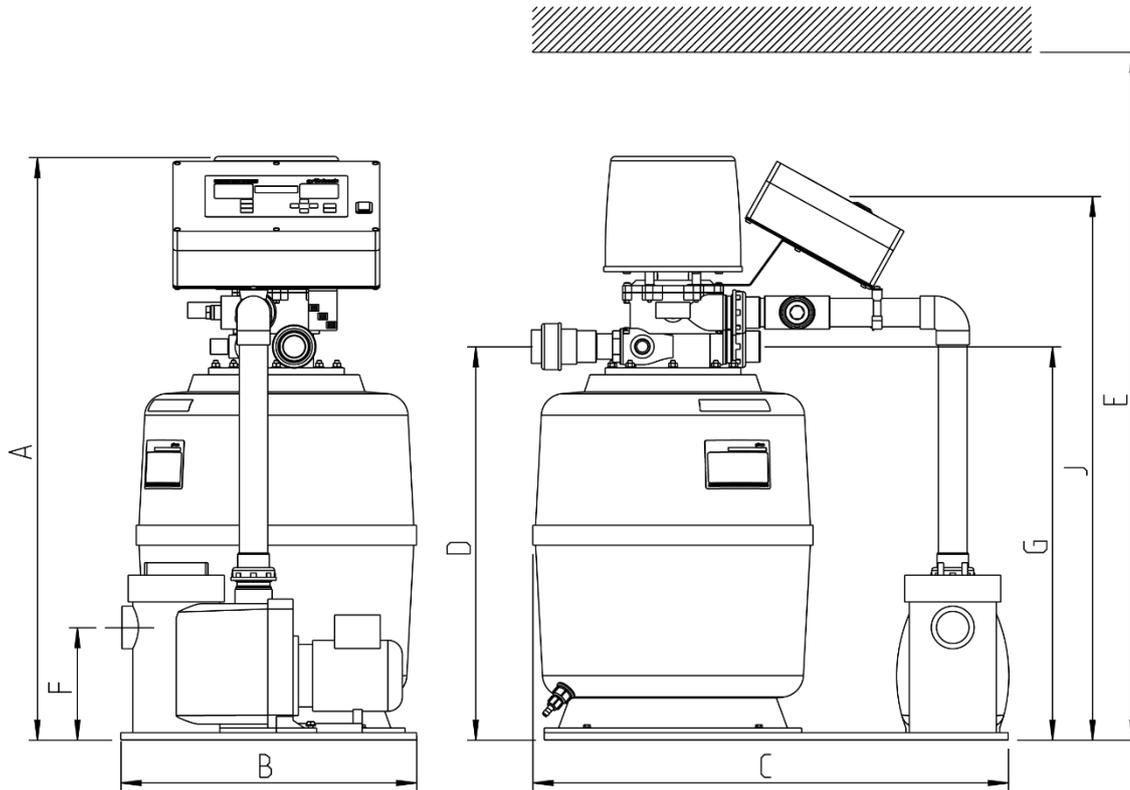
Dimensional drawing of GENO-mat F 500 A filter system
